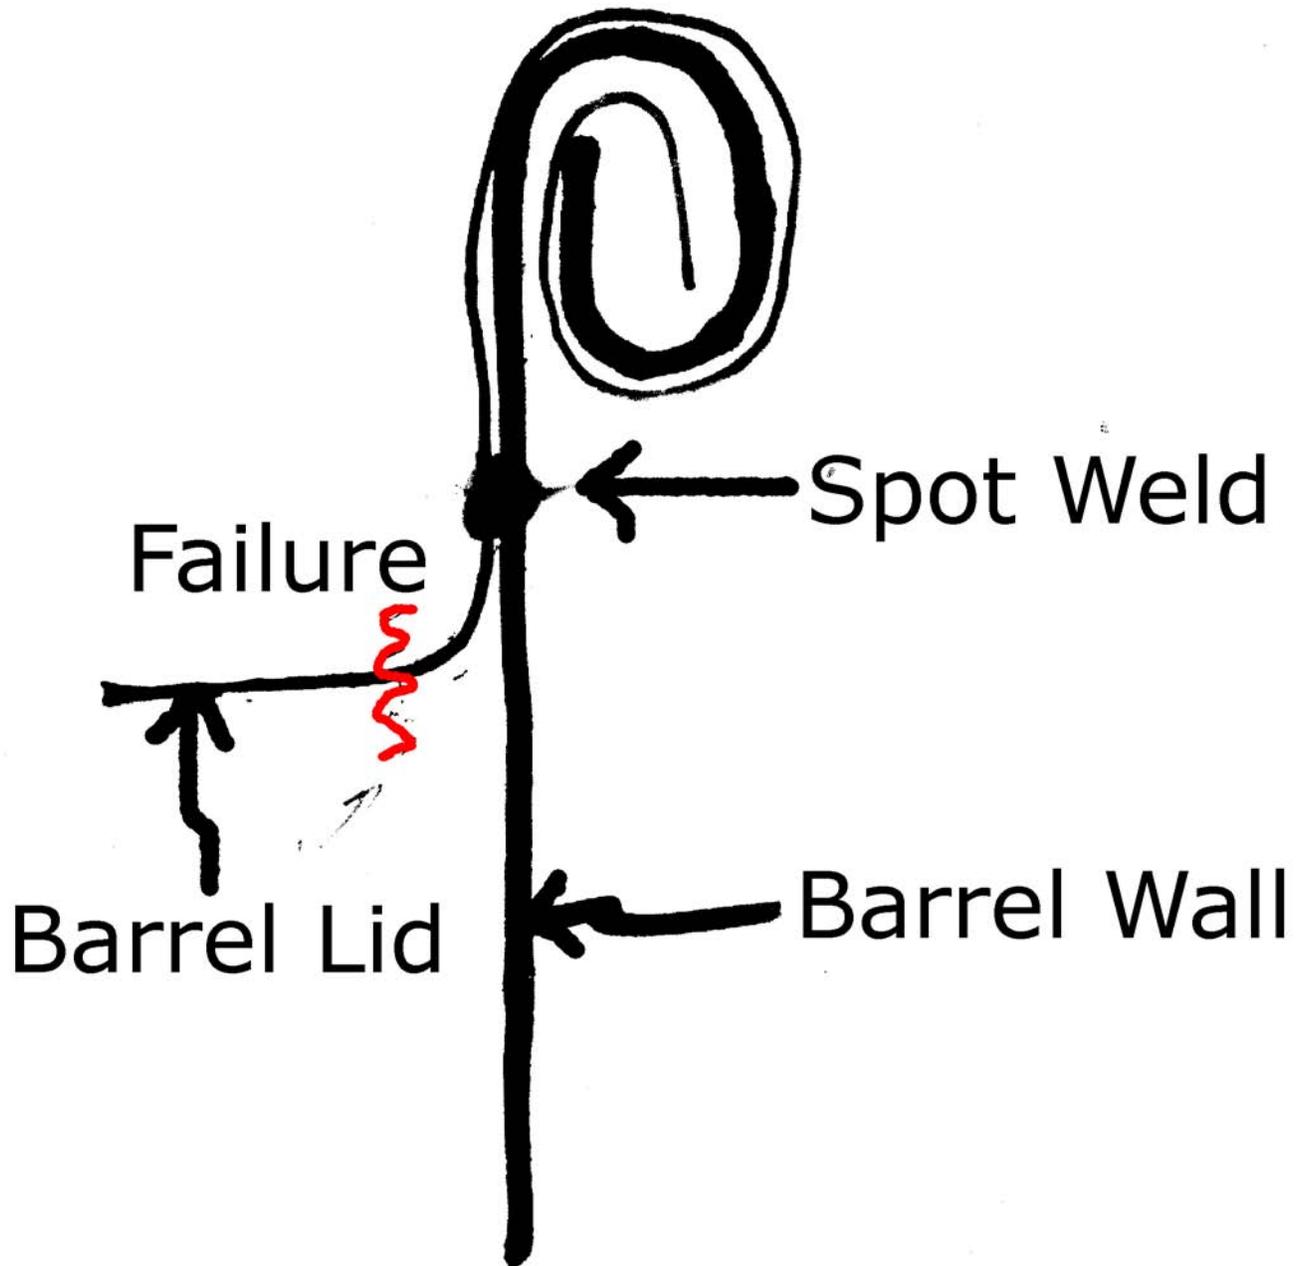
Rough sketch showing barrel seam, which is rolled and welded, and the nearby failure.
